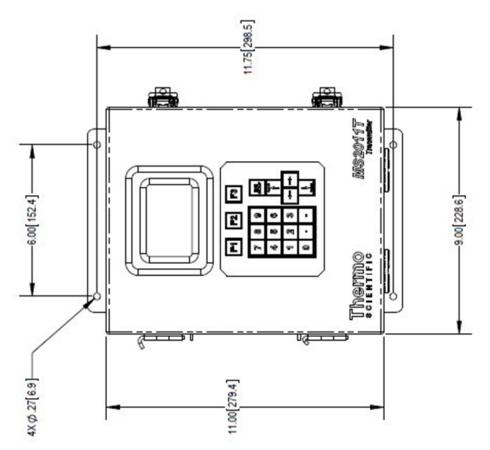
4-0700-150: Installation drawing, remote system transmitter with NEMA 4X housing
